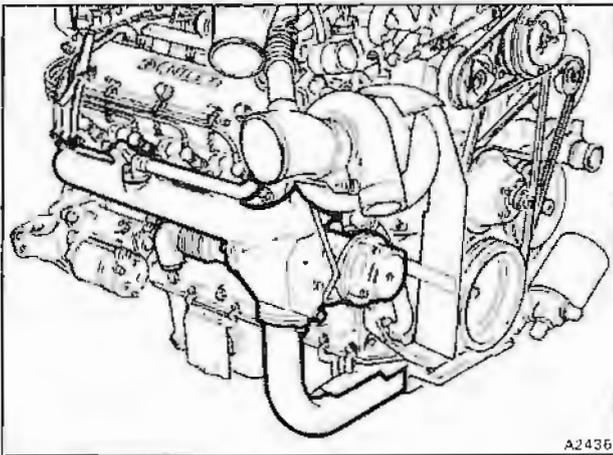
One piece exhaust manifold – 'A' bank
